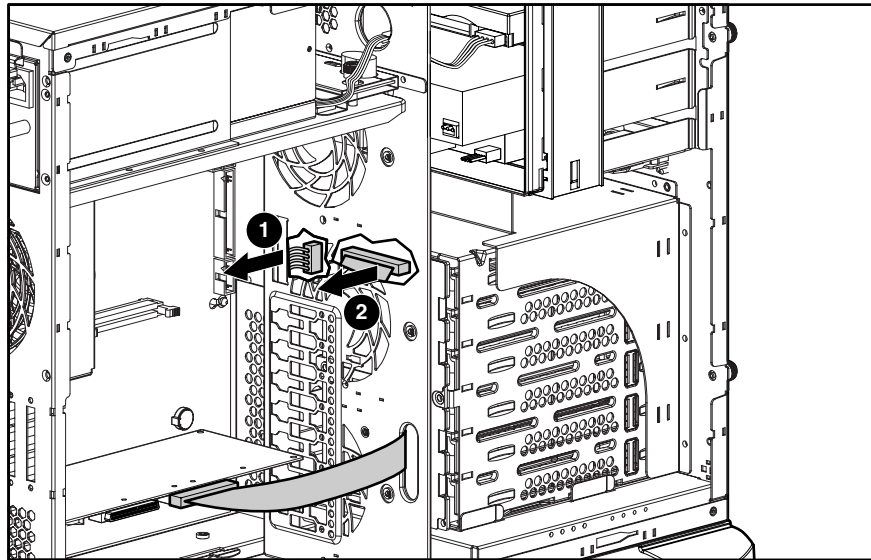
Disconnecting cables from the hot-plug hard drive cage
